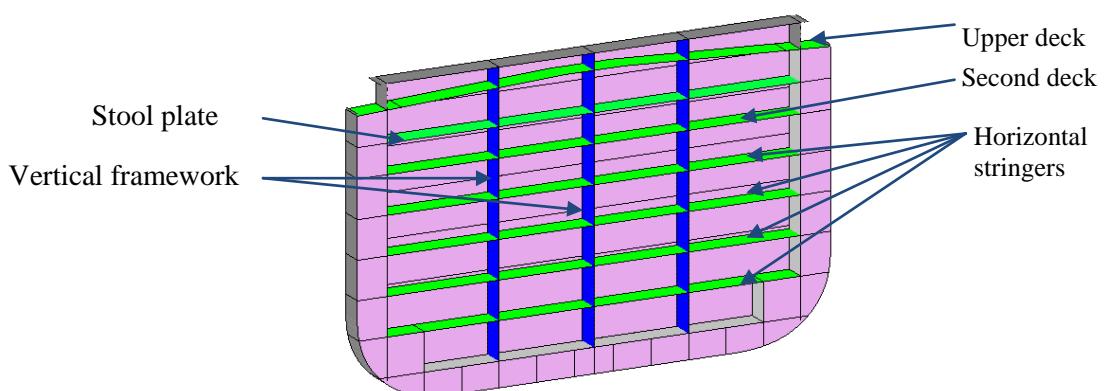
Watertight bulkhead structure: open side (non watertight side) of the watertight bulkhead.
